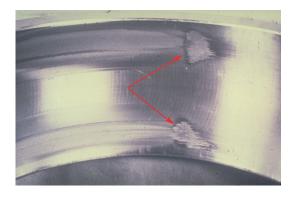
Smearing on the outer ring raceways of a spherical roller bearing
